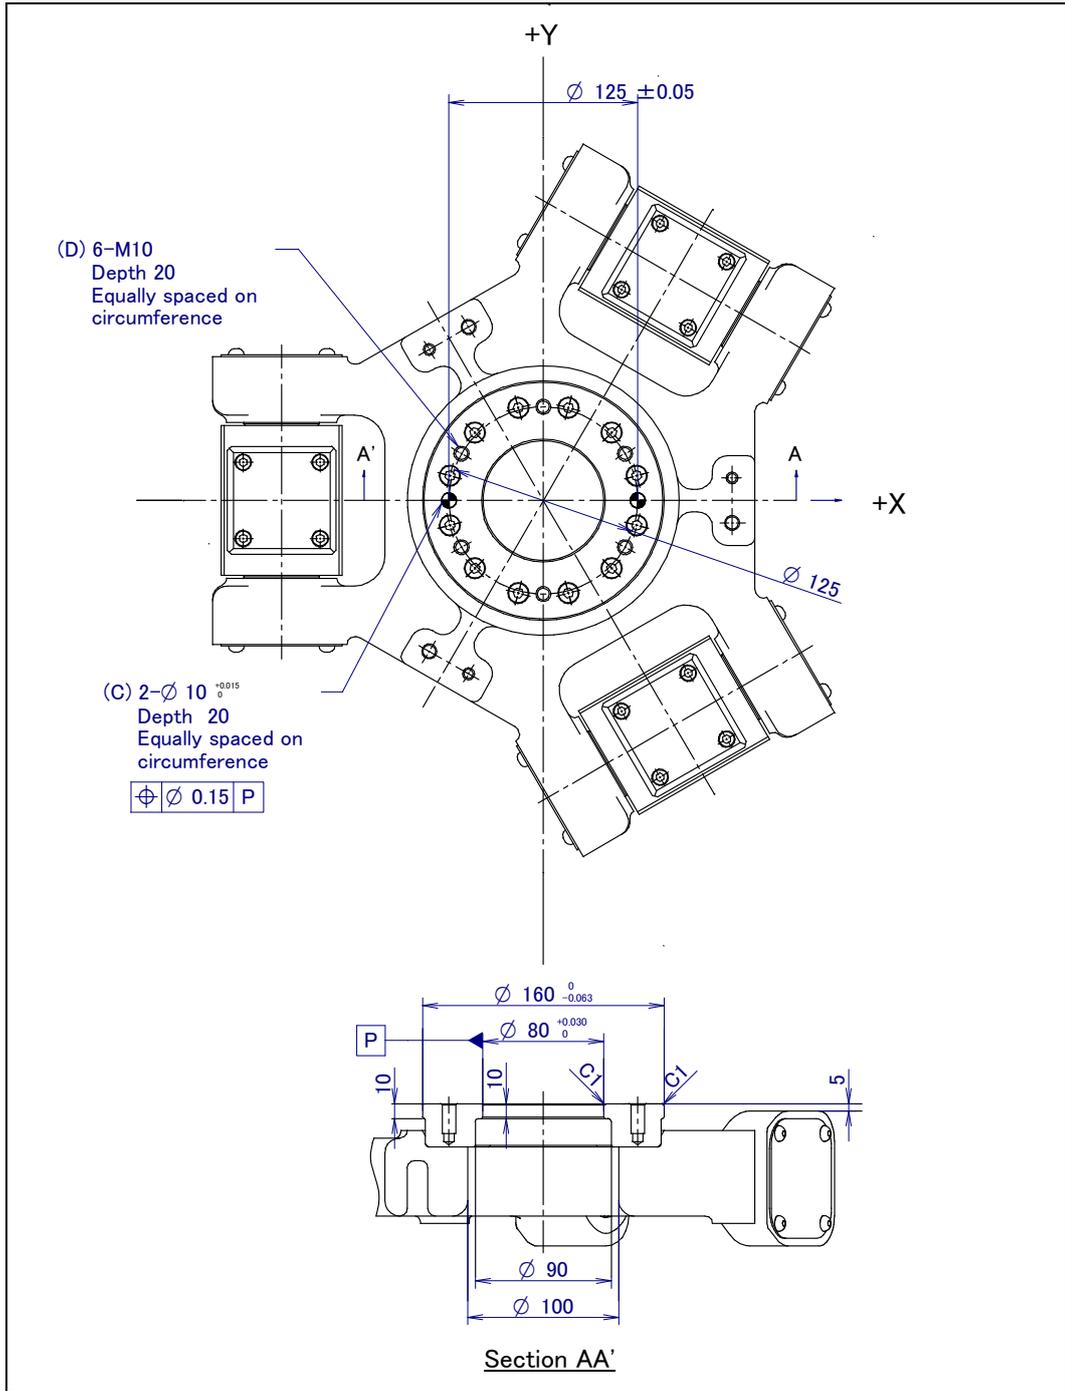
(c) End effector mounting face (ISO flange-not insulated)
